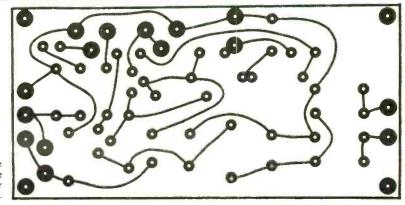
Actual-size foil pattern can be used to make your own circuit board.
